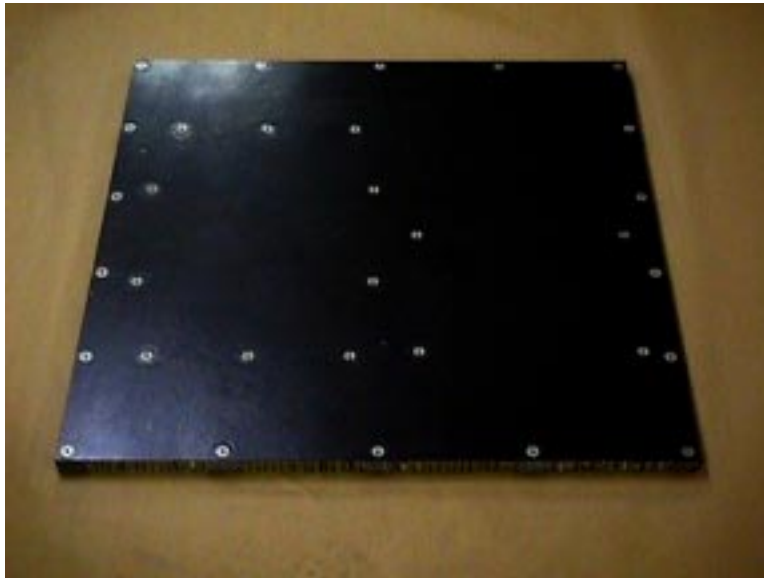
Interior surface of radiator panel after insertion of attachment inserts.
